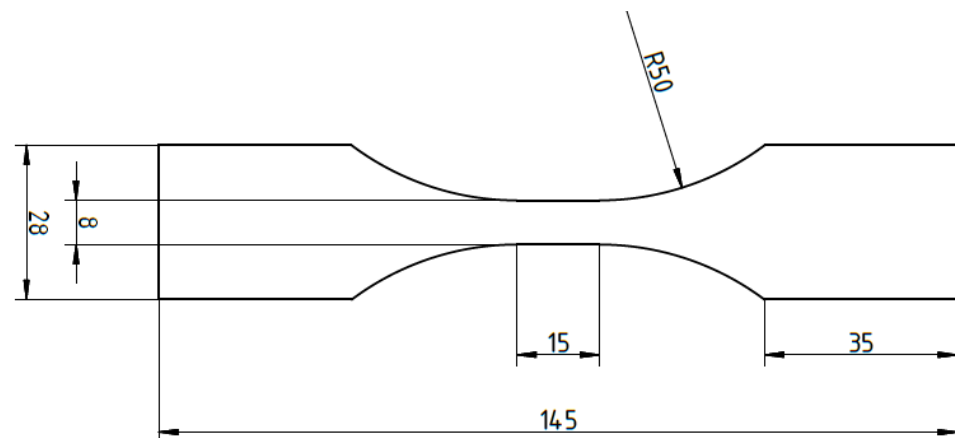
Specimen geometry used for tensile and fatigue testing made of 2 mm thick AISI 304 steel sheet with given dimensions in mm.
